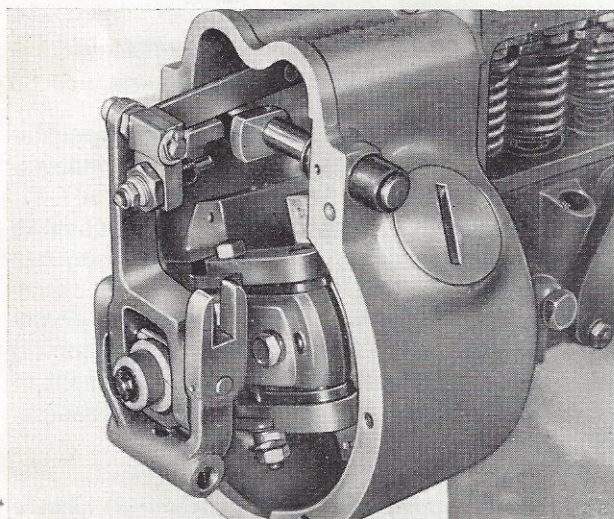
View of speed governor installed on the pump camshaft.
